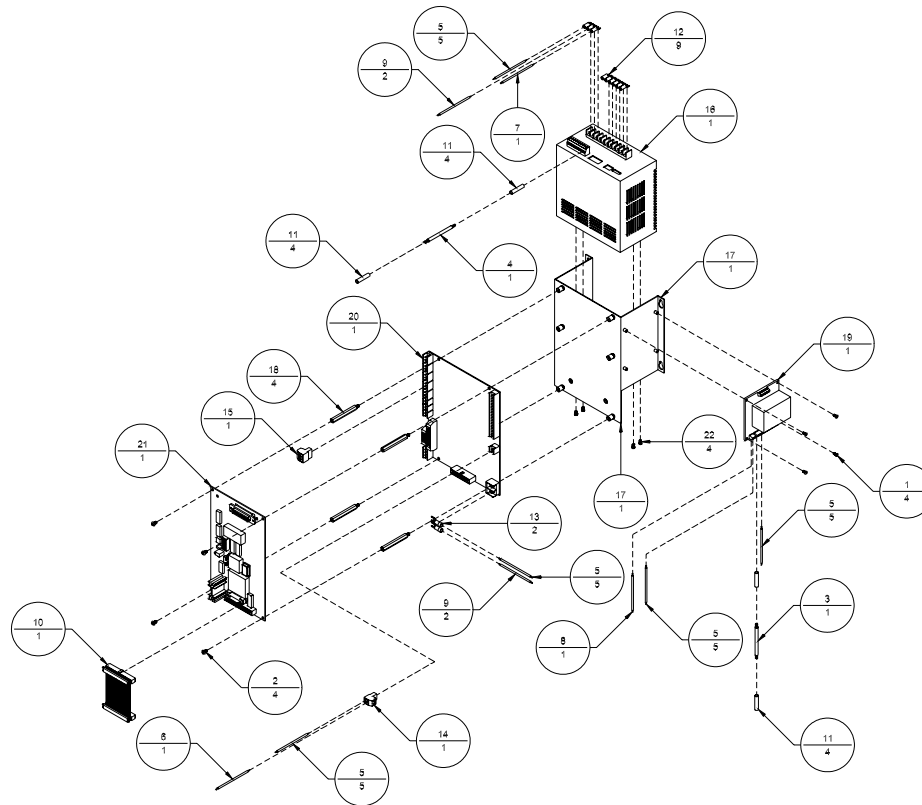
Stepper Motor Driver Cover Assembly (9101113A)
